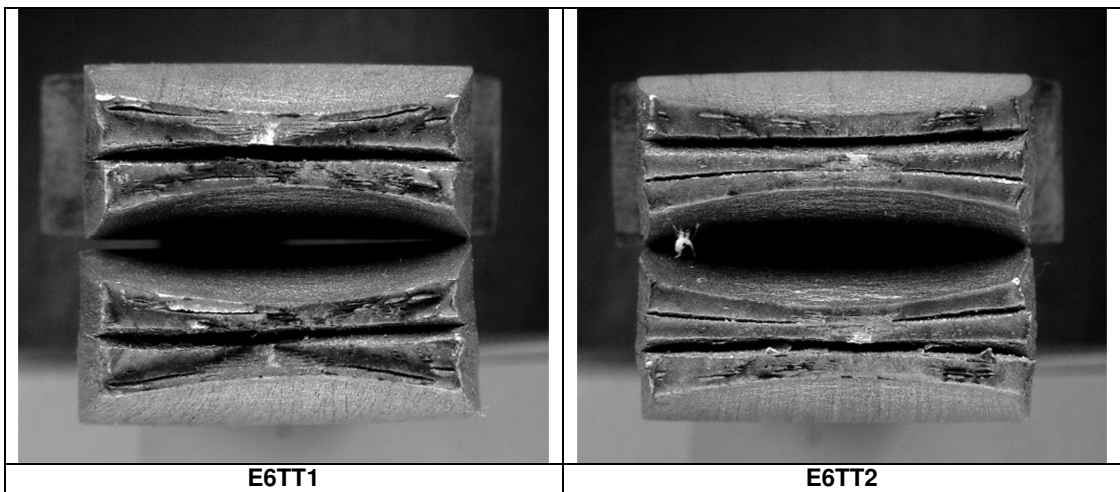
Fractographs of E6TT1 and E6TT2 specimens.
